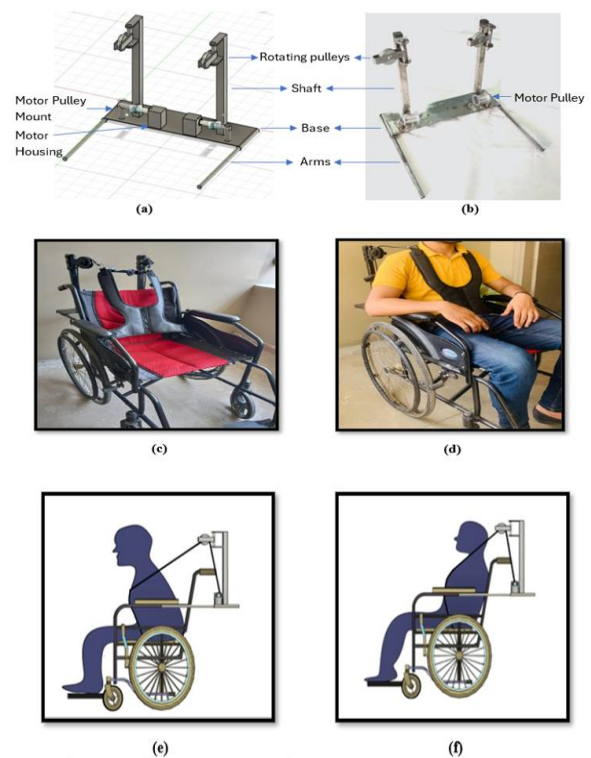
The RTAD. (a) CAD Model (b) SS Mechanical Structure (c) wheelchair mount and (d) with user. The schematic diagrams showing (e) forward (f) backward movement of user
